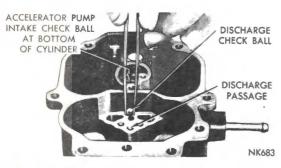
Installing Accelerator Pump Discharge Check Ball
